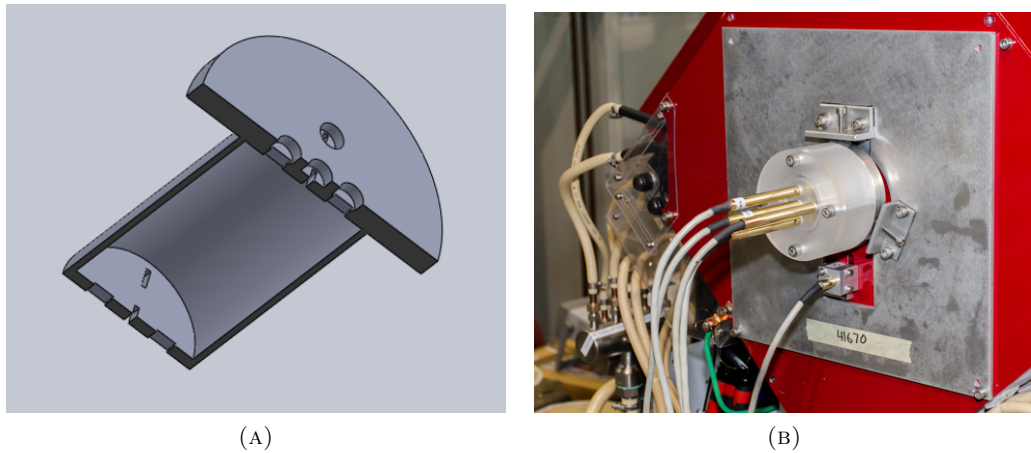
A) Cross-sectional view of the Q1 field measurement jig drawn in SolidWorks. B) Image of the Q1 measurement set up.
